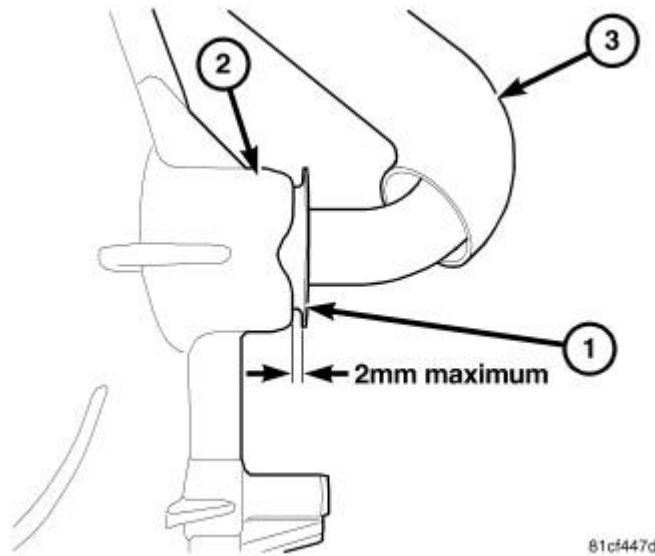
Identifying EGR Flange, EGR Tube & Intake Manifold
